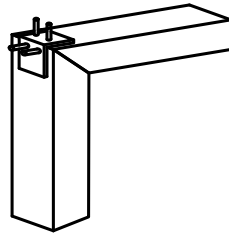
B TABULAR MITERED WELDED FRAME
